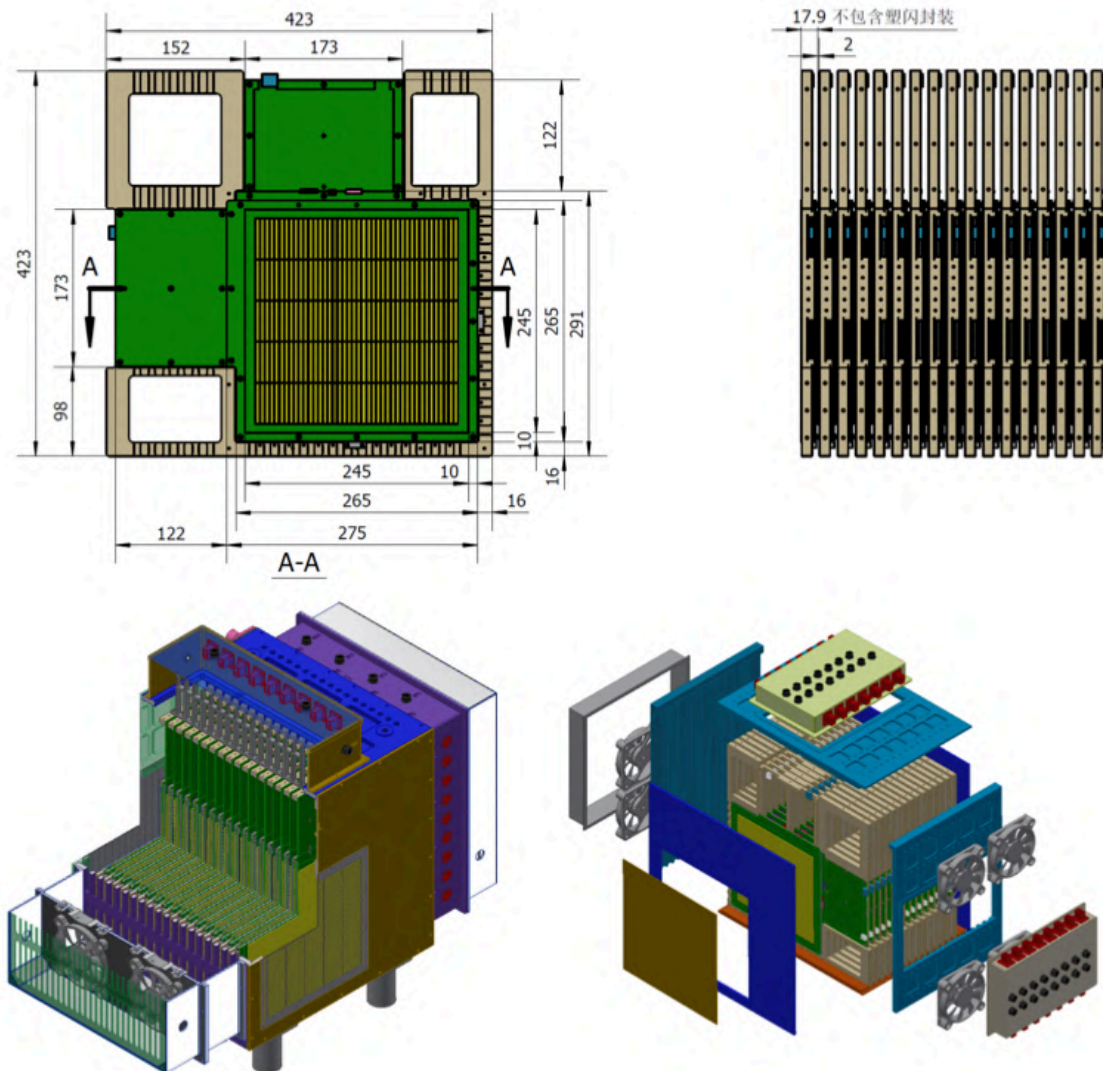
Design of the mechanical structure of the prototype, the schematic diagrams of super layer structure (top left), super layer arrangement (top right), the internal section of the prototype (bottom left), and the exploded view of the prototype (bottom right)
